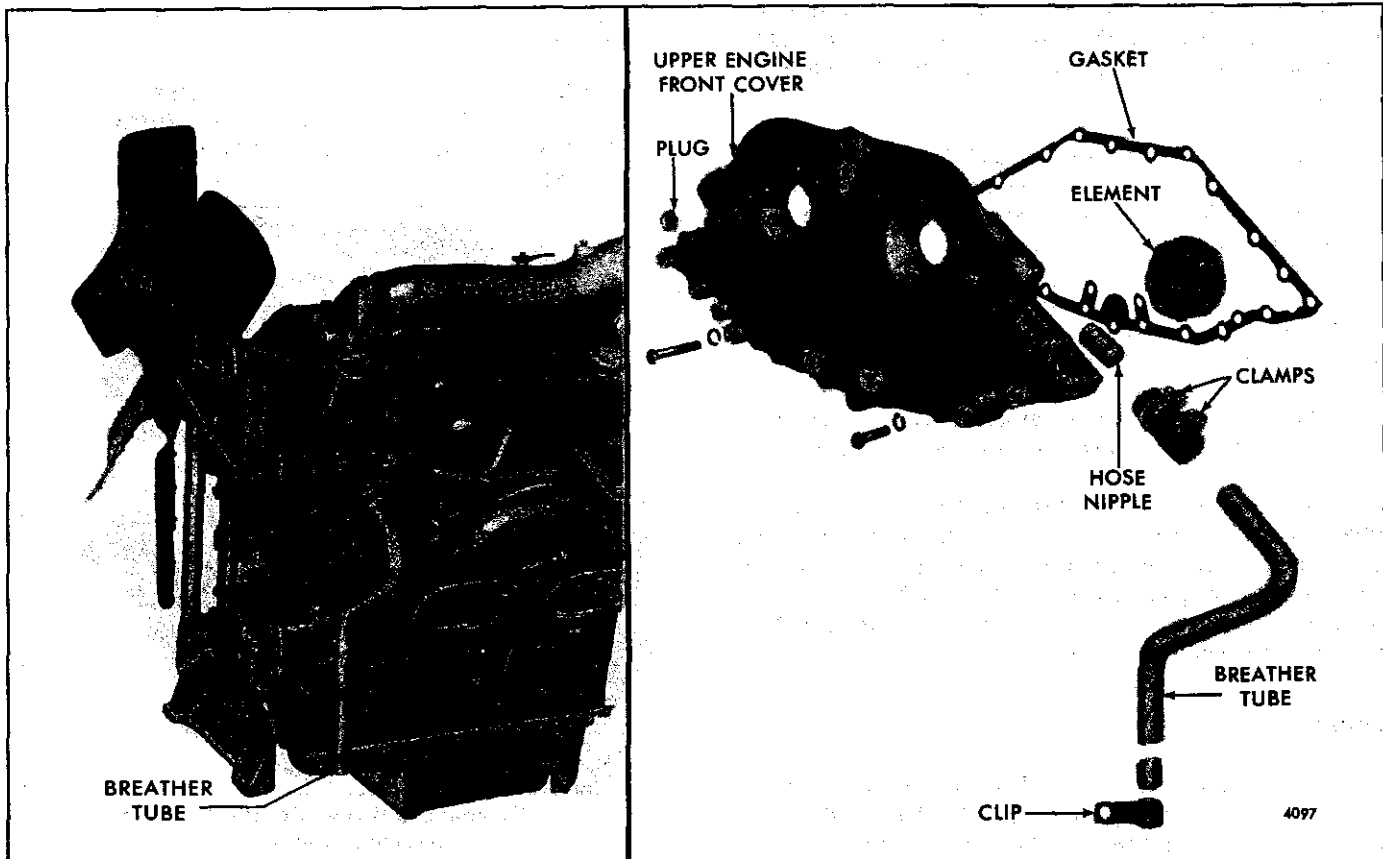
Typical Crankcase Breather Mounting and Details (6V-53 Engine)
